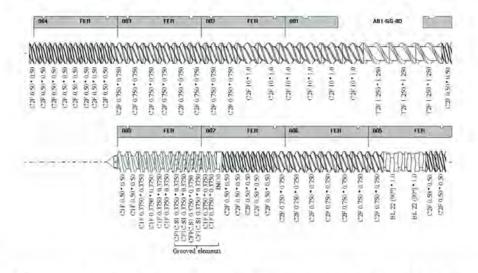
Screw configuration of the Clextral Evolum HT 53 twin-screw extruder used for the thermomechanical fractionation of the grinded rice straw (screw profile drawn using the CompoVis software from Clextral company). C2F, conveying double-thread screws; T2F, trapezoidal double-thread screws; BL22-90°, bilobe paddle-screws with a 90° mounting angle (i.e. positioned in staggered); INO0, linking element between double- and simple-thread screws; C1F, conveying simple-thread screws; and CF1C, reversed simple-thread screws. The two numbers following the type of screw indicate the length and the pitch of C2F, T2F, C1F, and CF1C screws, respectively (numbers in proportion to the screw diameter, i.e. 53 mm). The number following the bilobe paddle-screws indicate the length of the BL22 screws.
